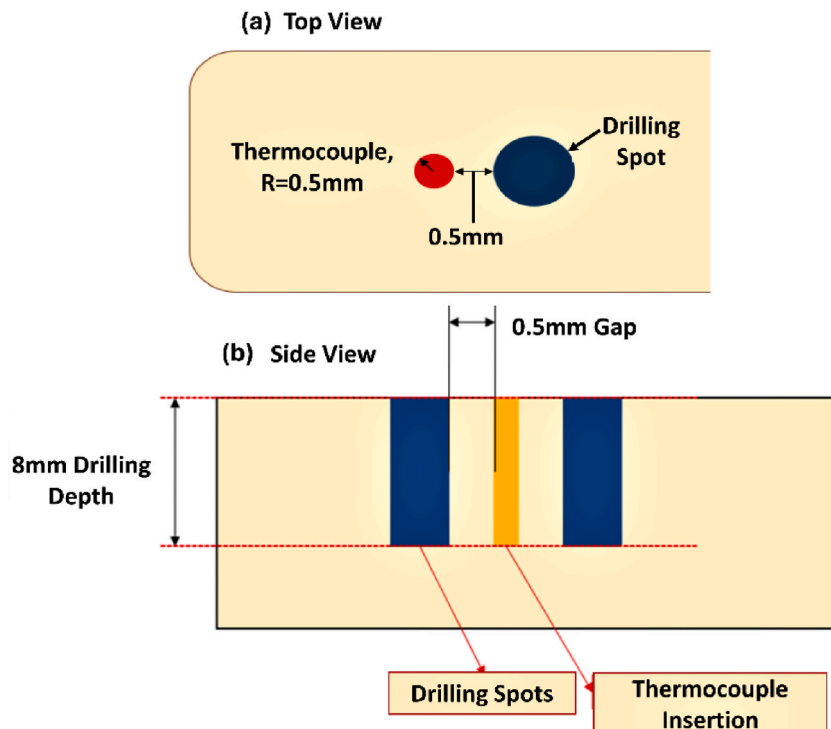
Schematic of the polyurethane block workpiece during the drilling process (a) top view: shows the arrangement of the thermocouple ($R = 0.5$ mm) and drilling spot, with a 0.5 mm gap between them and (b) side view: Illustrates the 8 mm drilling depth, with the thermocouple insertion and drilling spots aligned with a 0.5 mm gap
